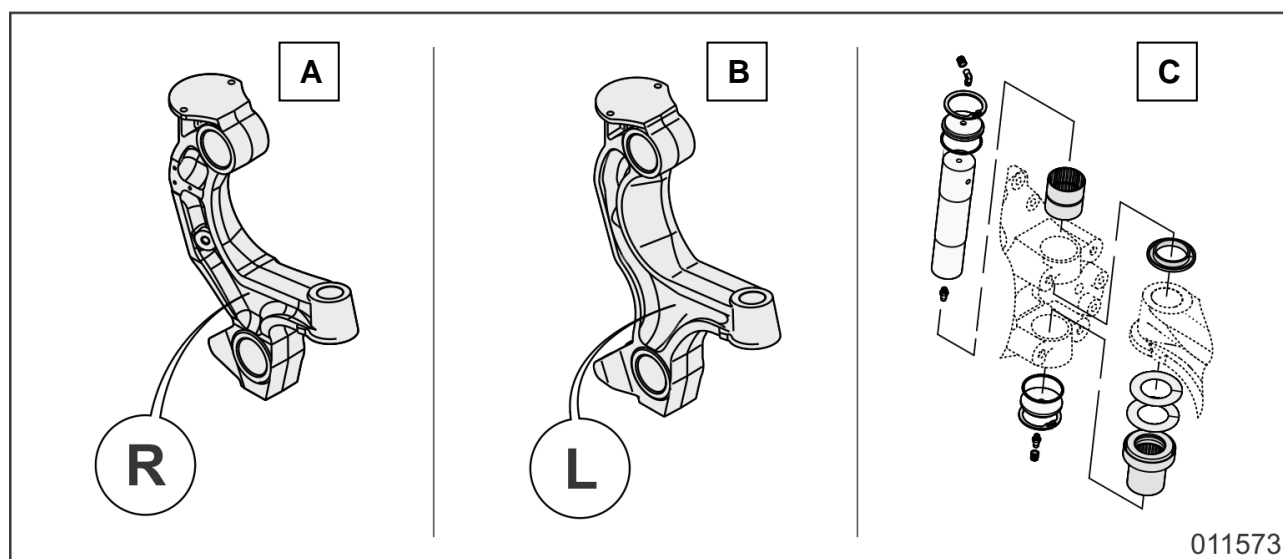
RH/LH steering knuckle carriers and king-pin repair kit
